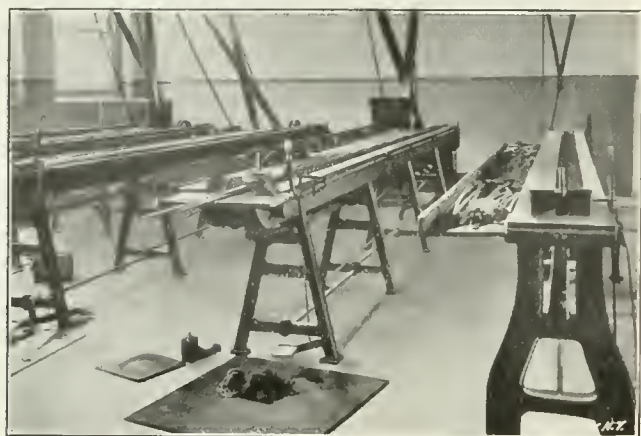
Draw Benches for Starting the Hollow Gold Wire
